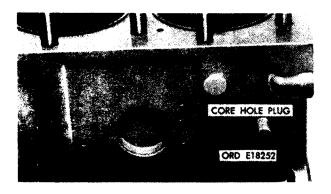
REMOVING OR INSTALLING ENGINE NAME PLATE FOR CORE HOLE INSPECTION.
